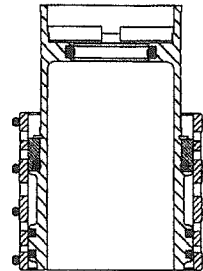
DRY LUBE APA VALVE ASSEMBLY
